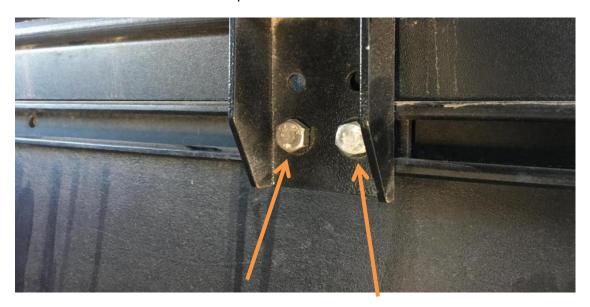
You will fasten through these holes with 2 Button Head Bolt, Flat Washers and Spring Washers
